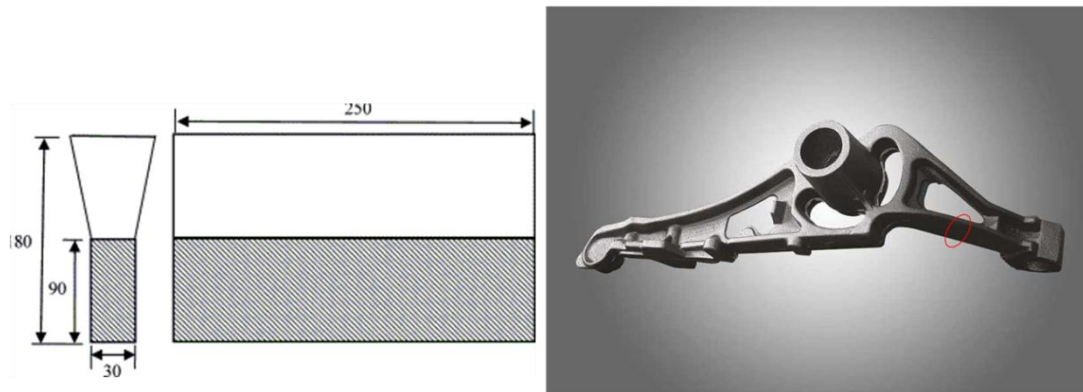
dimension of Y-Block sample and car part picture under studied (respectively left and right).
